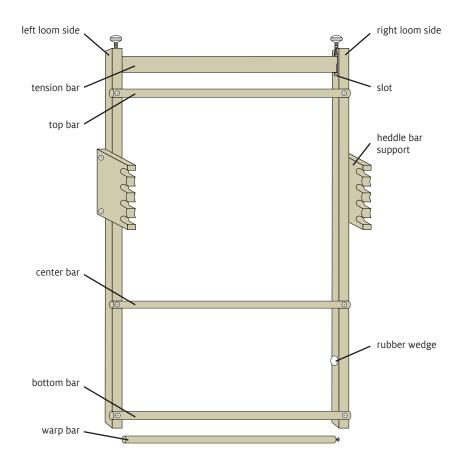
PARTS OF THE TAPESTRY LOOM
